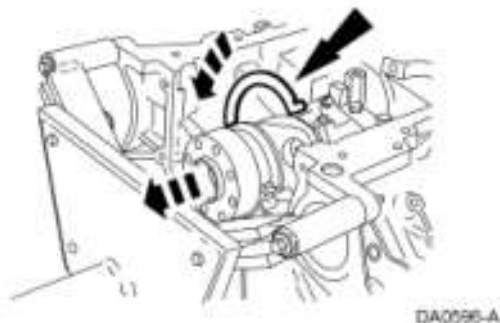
Installing Rear Crankshaft Upper Thrust Washer
